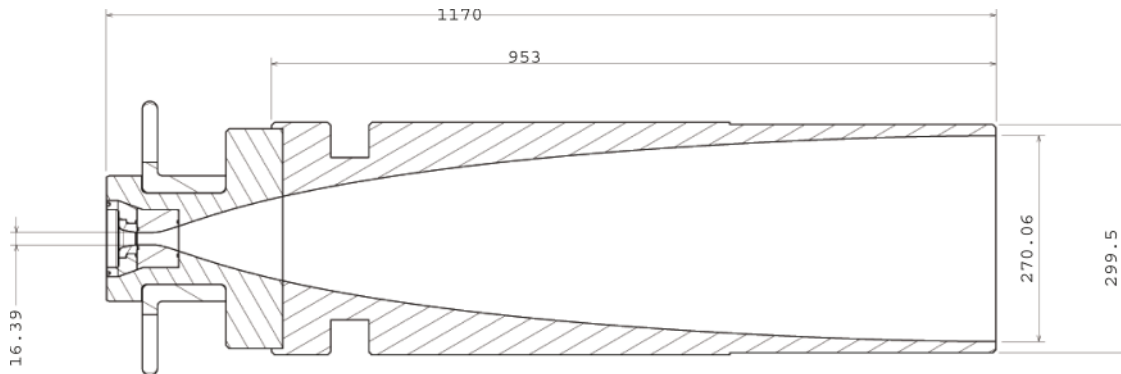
Mach 8 nozzle schematic [17] (Dimensions in millimetres)
